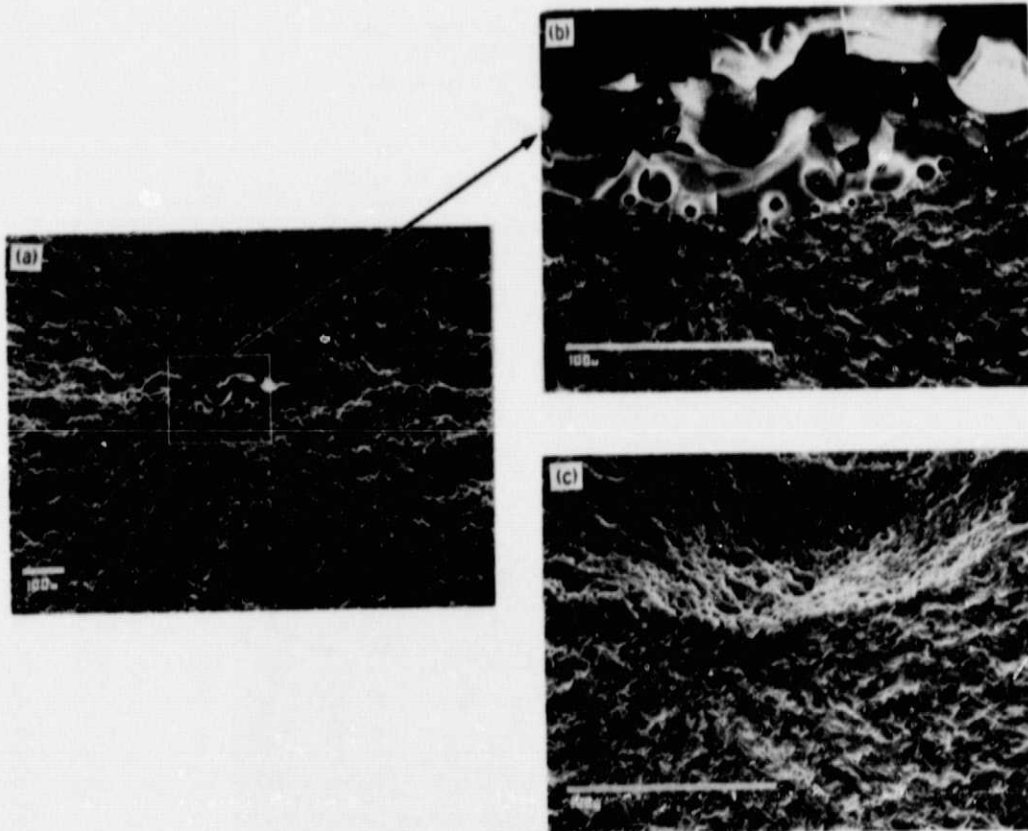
Trailing edge fracture origin of a burner rig corroded specimen ( $\sigma_f$  228MPa). (a) Matting halves of fracture origin. (b) Glassy product at origin. (c) Pitting at origin revealed by HF dissolution.
